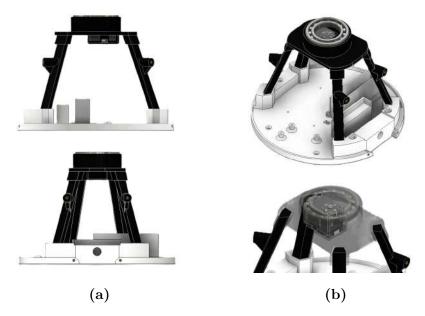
Details of the support structure: (a) Front and right views, (b) Motor detail.
